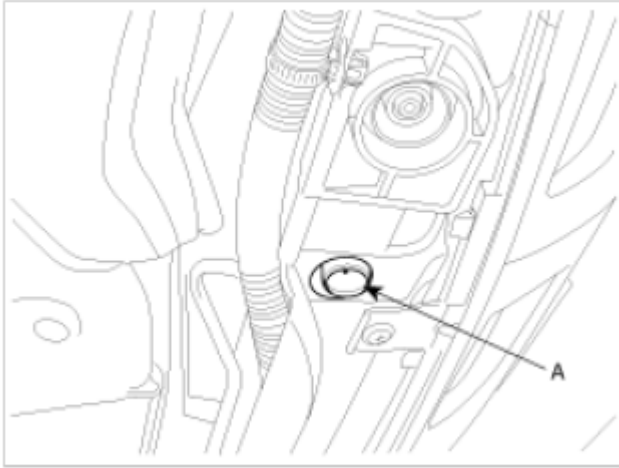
Locating Exhaust Manifold And Catalytic Converter Assembly
